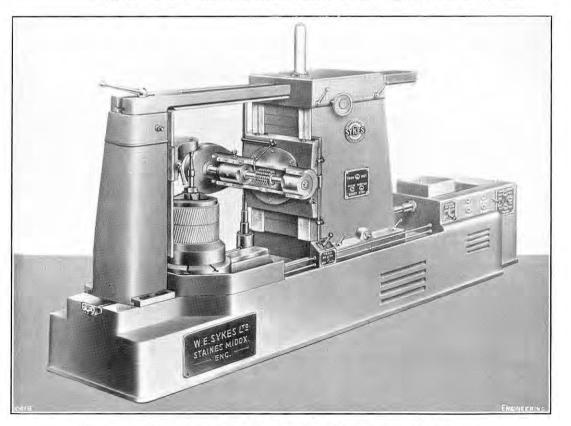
24-in. Diameter Universal Hobbing Machine; W. E. Sykes, I.td.
